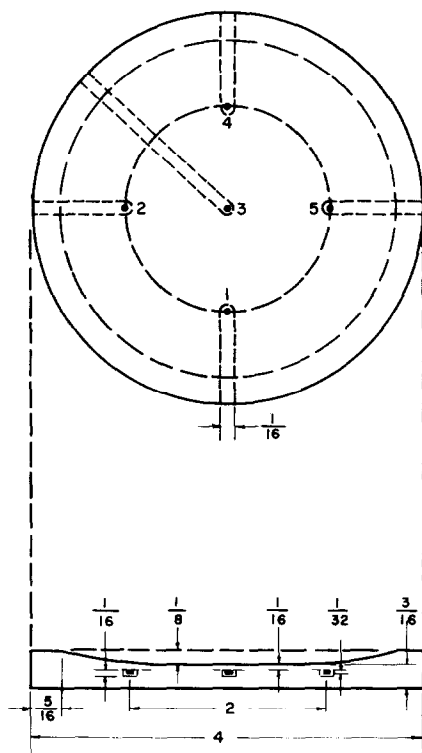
Diagram of stainless steel plate (dimensions in inches).
